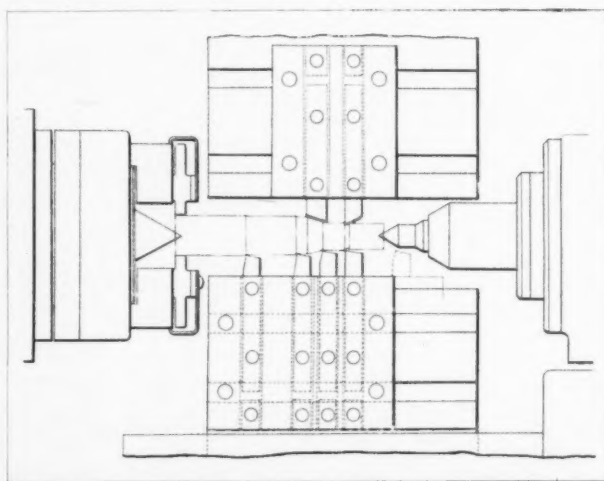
Tool Layout on a Drummond Maximinor Lathe for the First Turning Operation on the Final Drive Spindles
